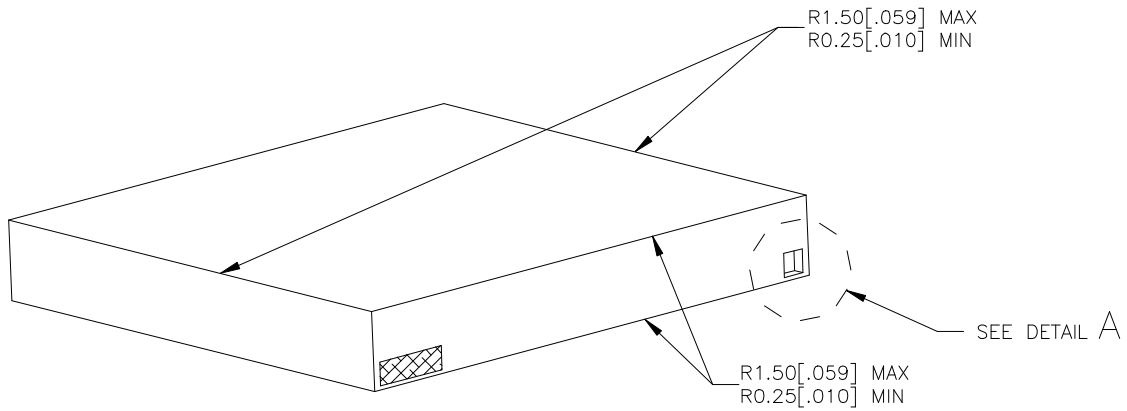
Edge Round Dimensions for DB20 and DB13
